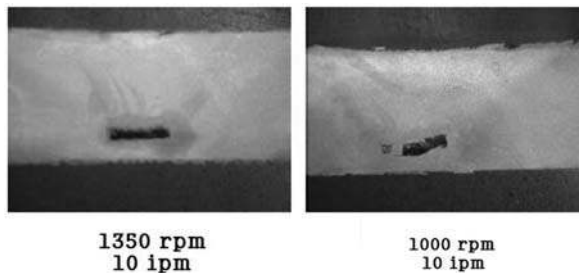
Weld defects resulting from worn trivex tool
